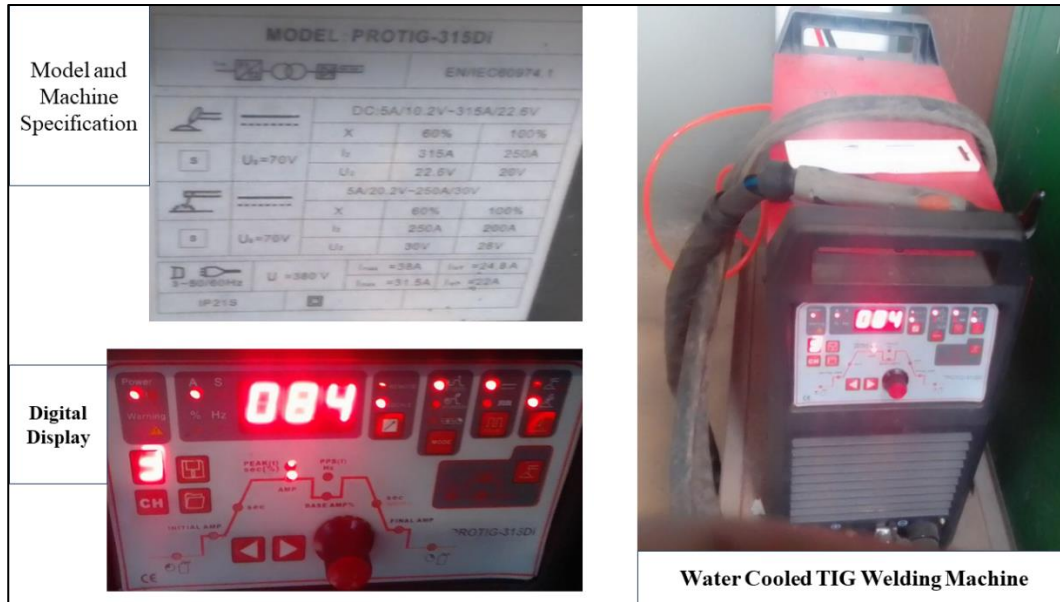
The TIG welding machine that was utilized to complete the experiment
